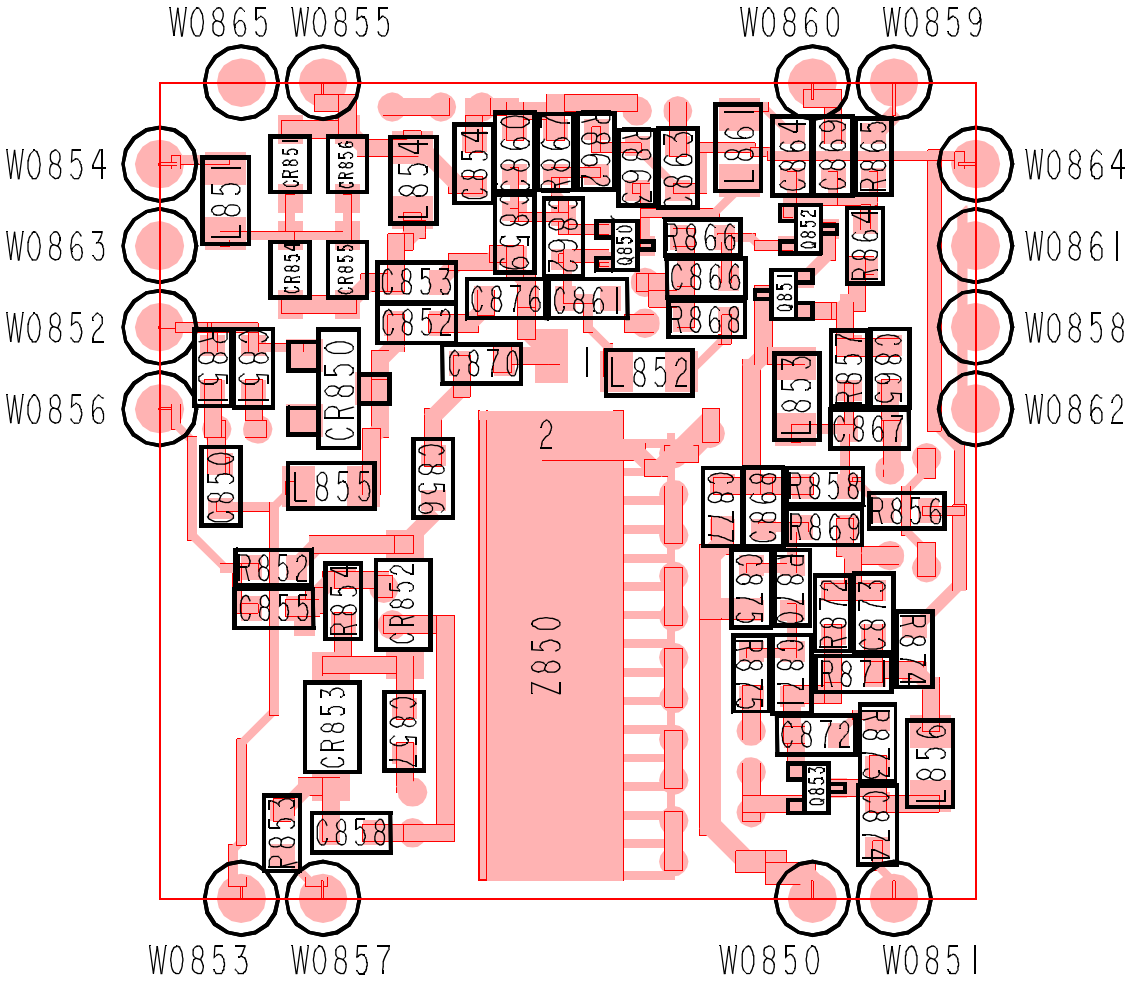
VCO COMPONENT LAYOUT (COMPONENT SIDE VIEW)
